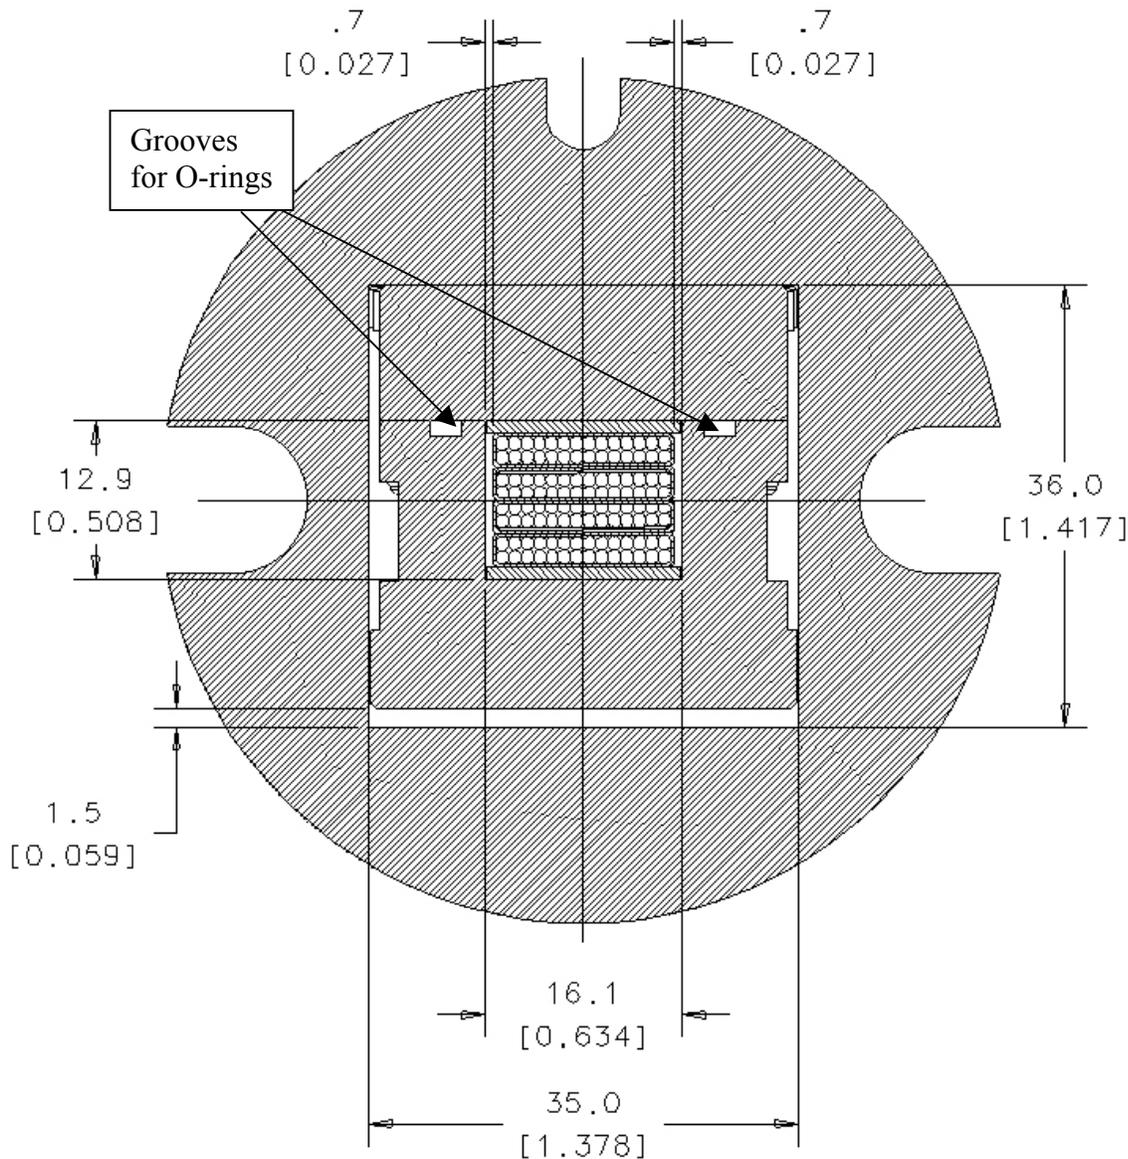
Cross section of the sample holder. Dimension in mm [inches].
